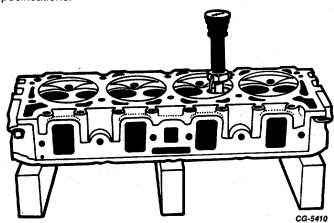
Using Gauge from SE-1631 Tool Grinder Set for Checking Seat Run-Out
